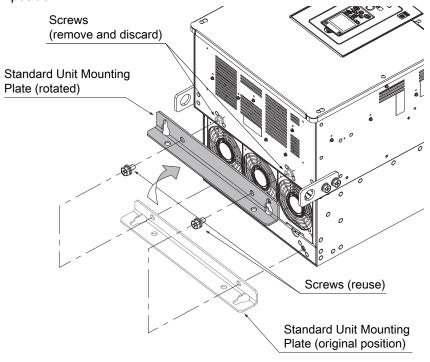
Remove Top Mounting Plate and Reattach in New Position
